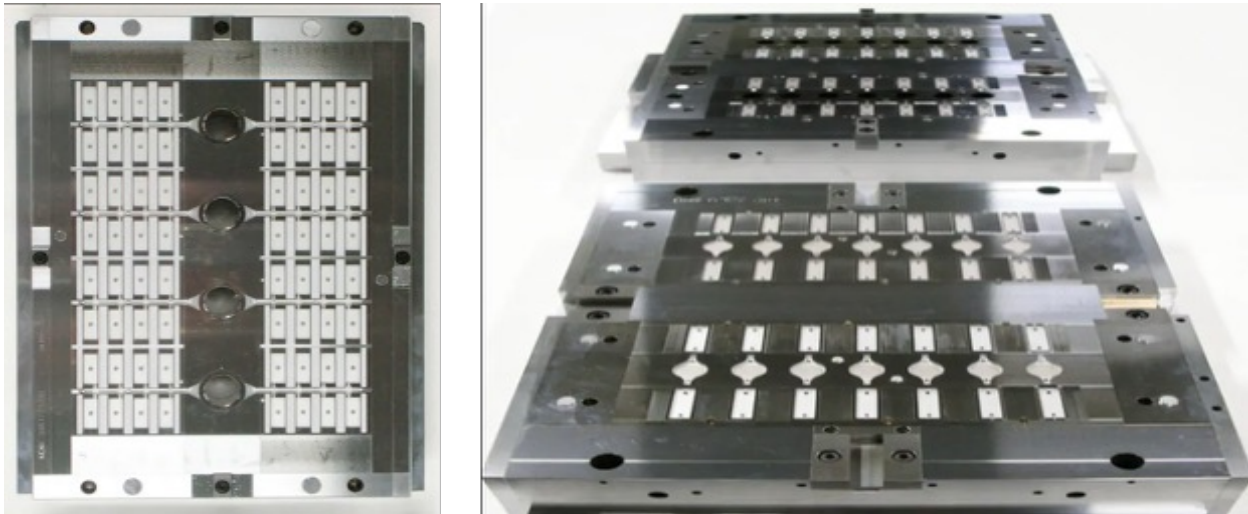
Upper molding plate for an SOT-style package (left), and upper and lower molding plates for a second type of SOT package (right).
